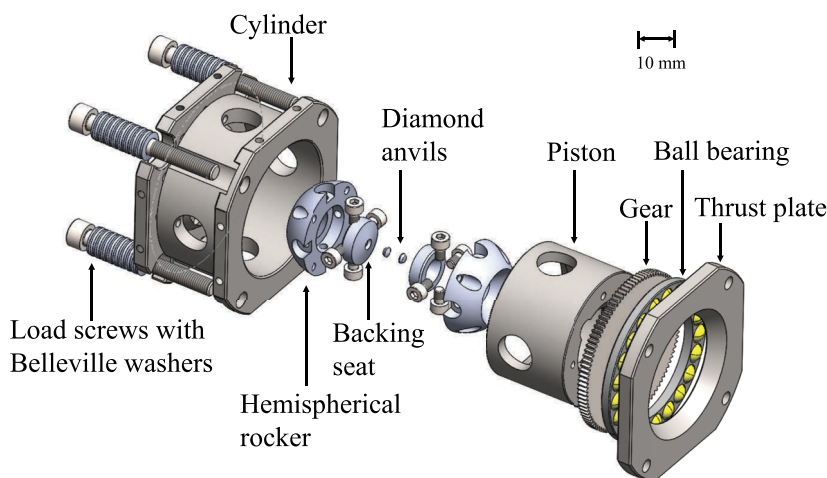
Exploded view of the newly designed and developed compact SSDAC.
